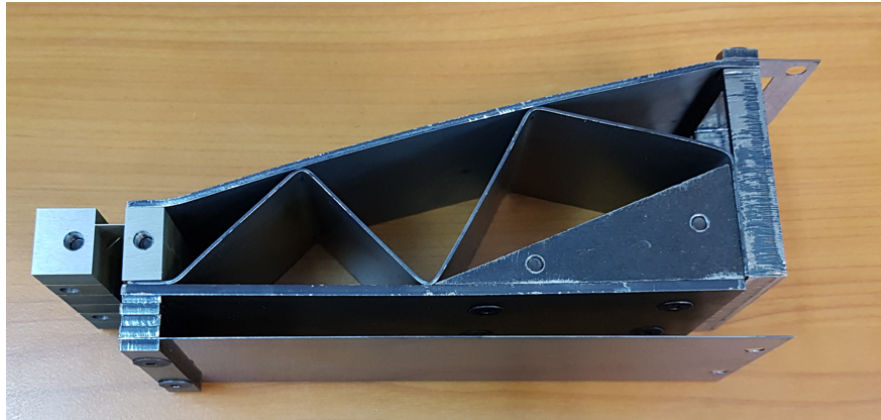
Fastening all the bolts and trapping the 1 mm plate inside the mechanism.
